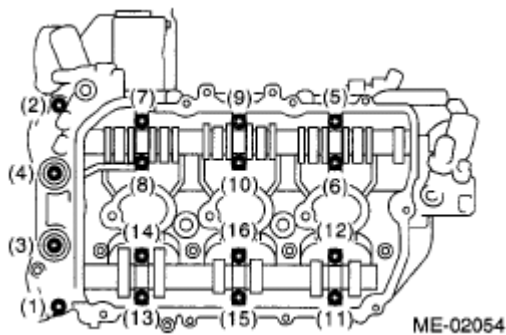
Identifying Camshaft Cap Bolts Loosen Sequence
